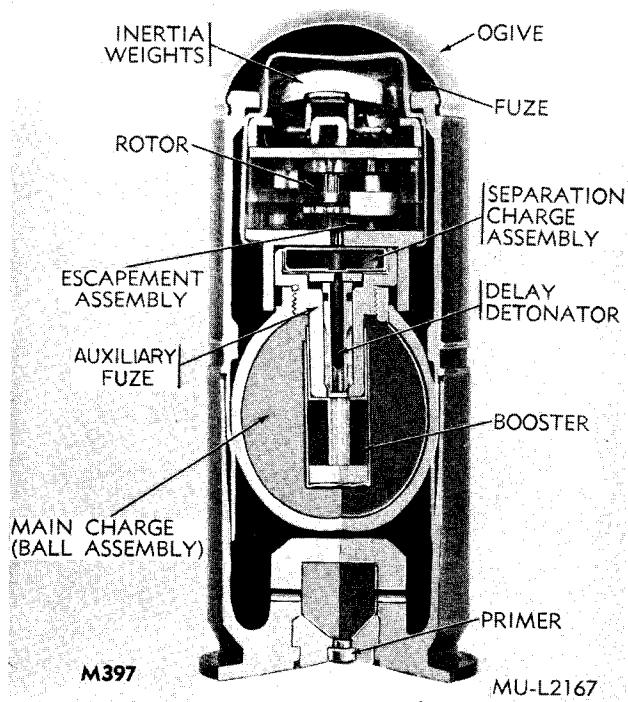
Cartridge M397--cutaway view showing fuze M536.
